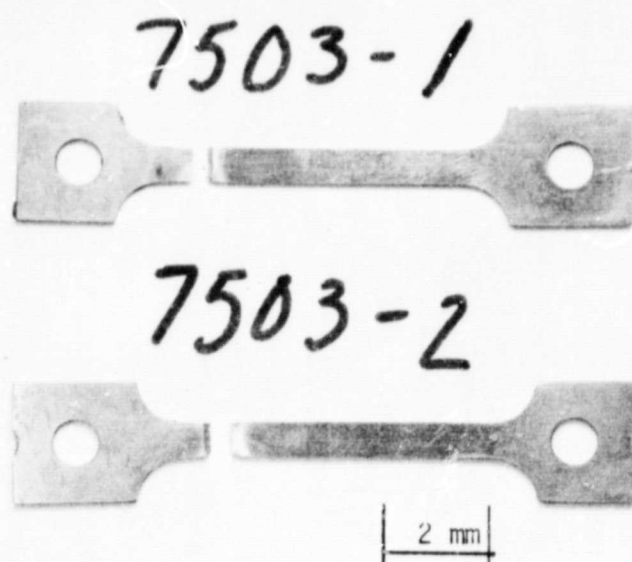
Photographs of Fractured Tensile Coupons, Passivated, 77K
